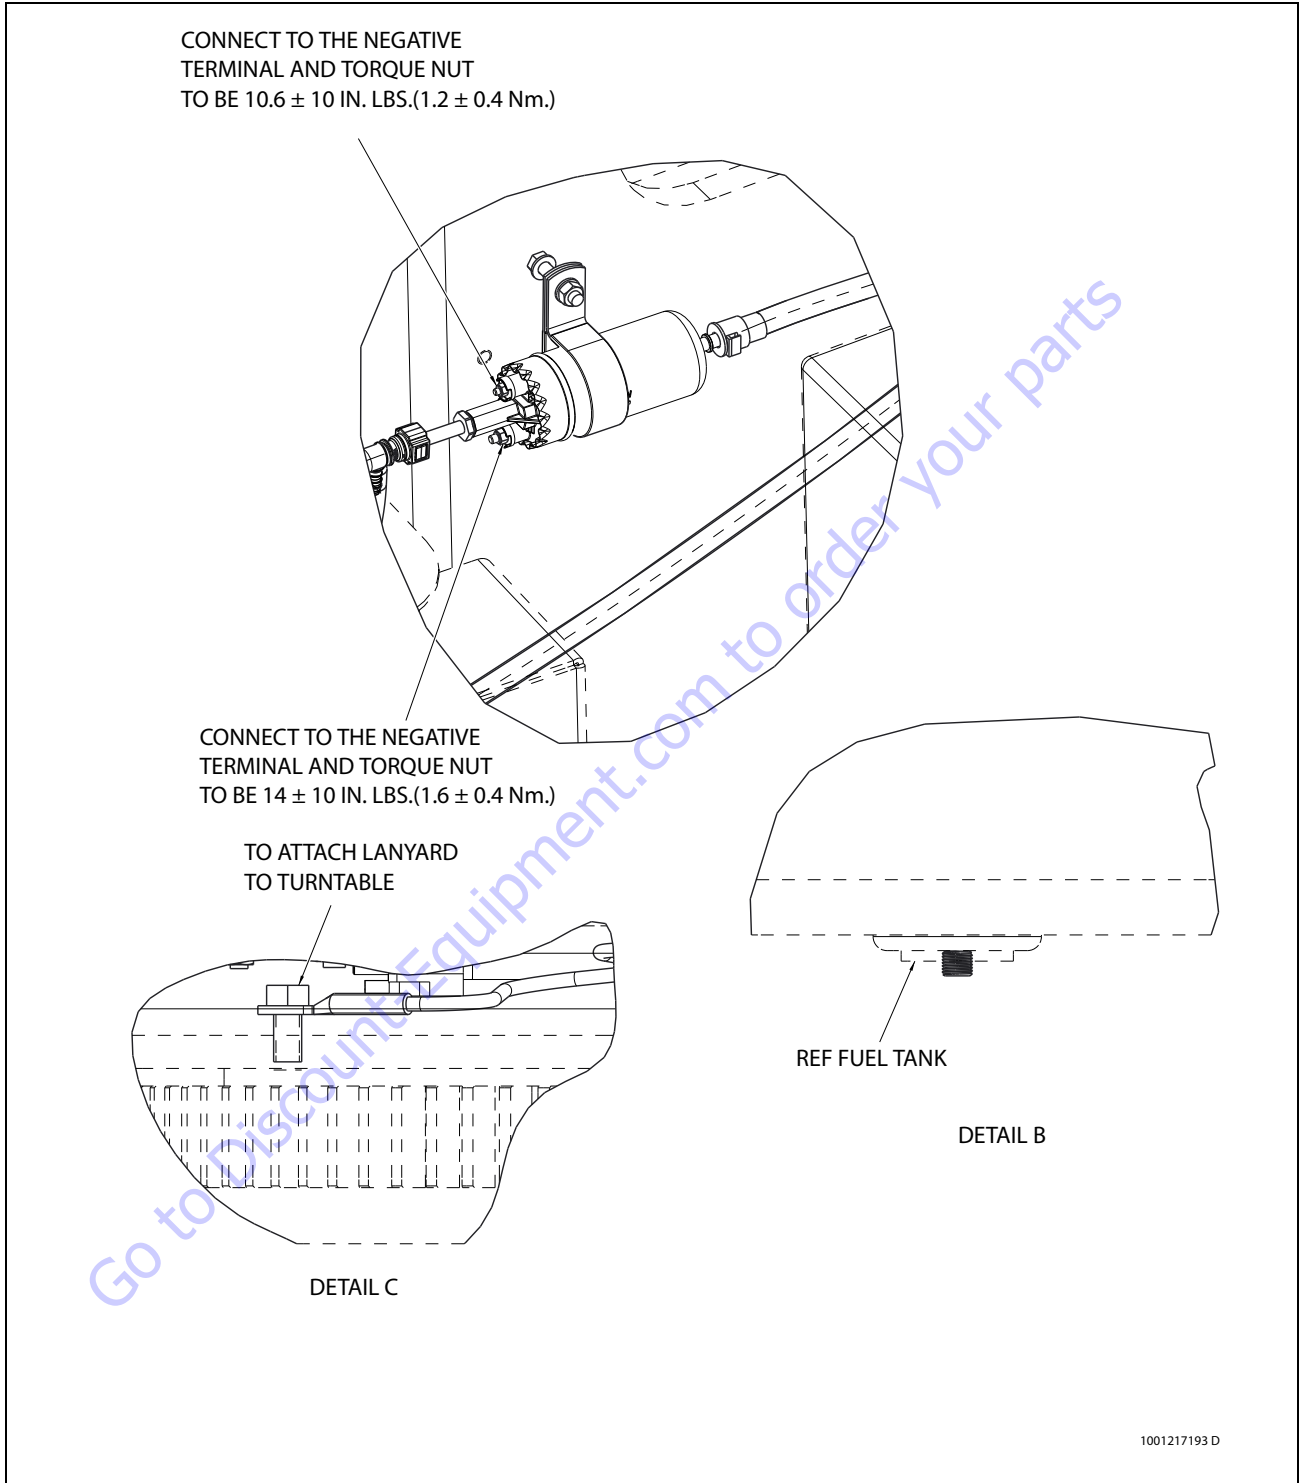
Ford Engine Installation - Sheet 4 of 4
